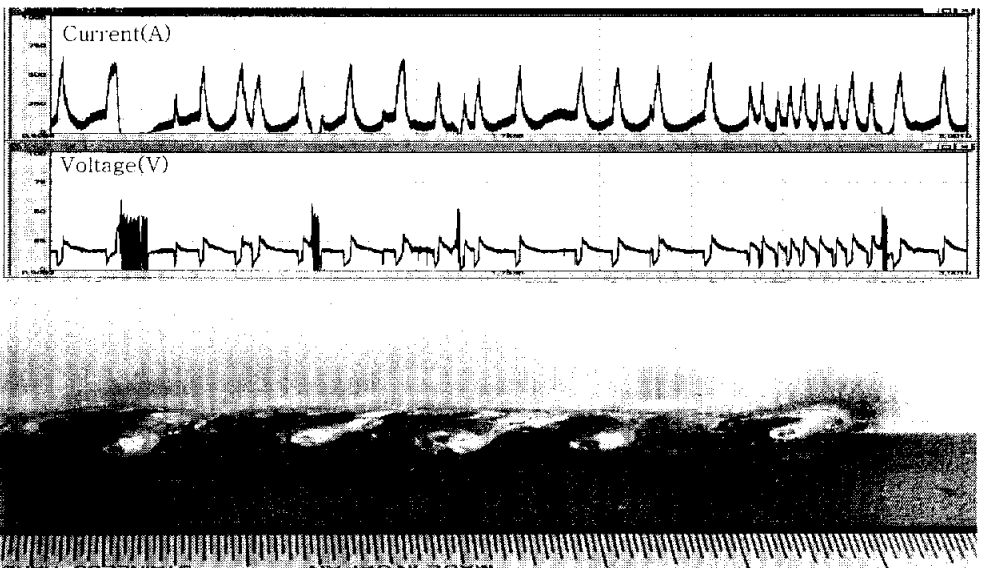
Waveforms and bead shape at welding current 155A
